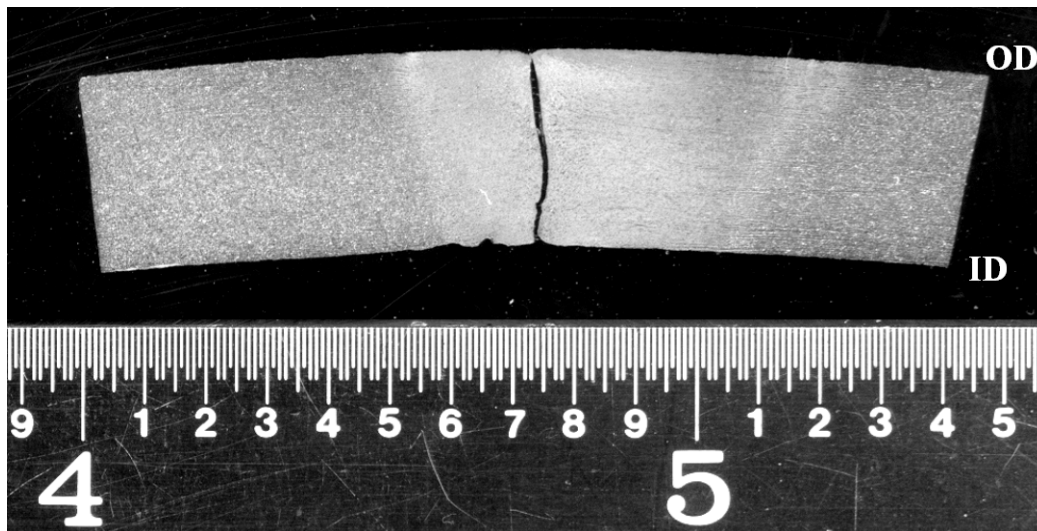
Appearance of the Cold Weld on a Metallographic Section across the Weld shown in Figure 8 (taken at the location of the yellow line in Figure 8)
